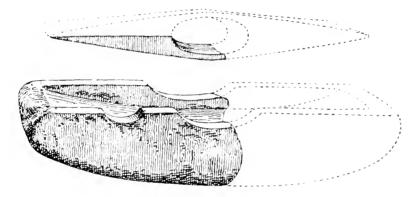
Stone Mould, and Ani. Cast in it (reconstructed).
